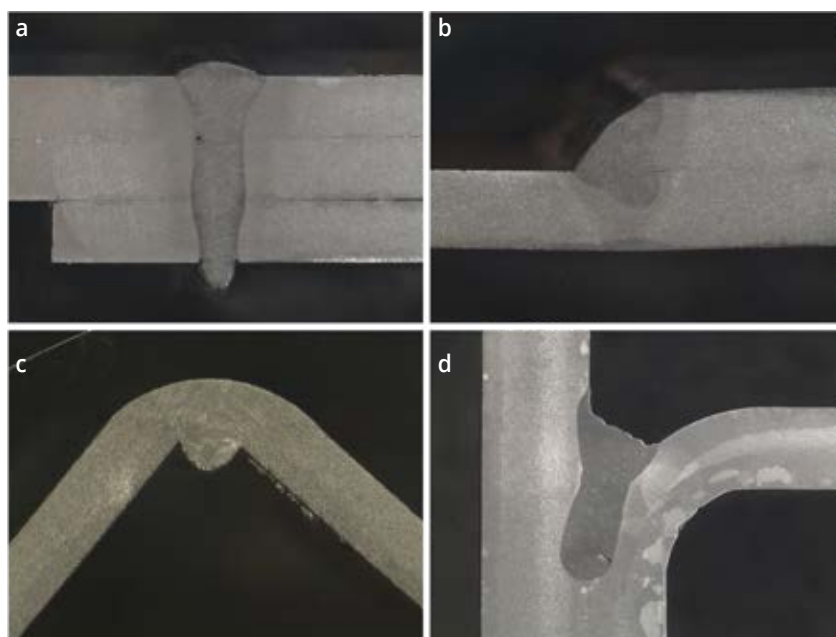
Different Al 6xxx geometries (a) lap joint 3 × 2 mm plates, 4047 wire (b) Al 6111 lap fillet joint 2 mm to 2 mm, 4047 filler wire (c) corner joint, no filler wire, (d) 6082 coach joint, 4047 wire (Source: IPG Photonics)
